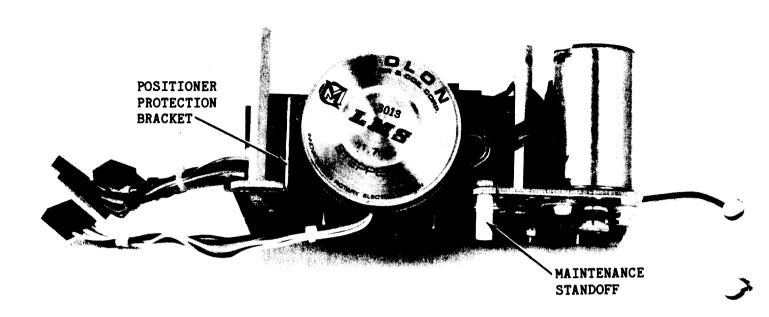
Positioner Mounting Screws and Protection Bracket
